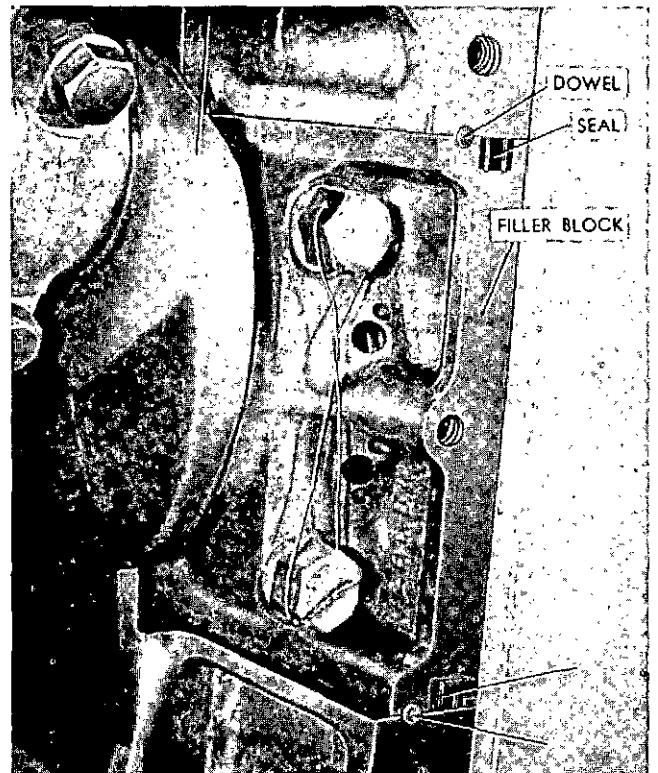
Rear Bearing Filler Block Showing Lock Wires in Place
